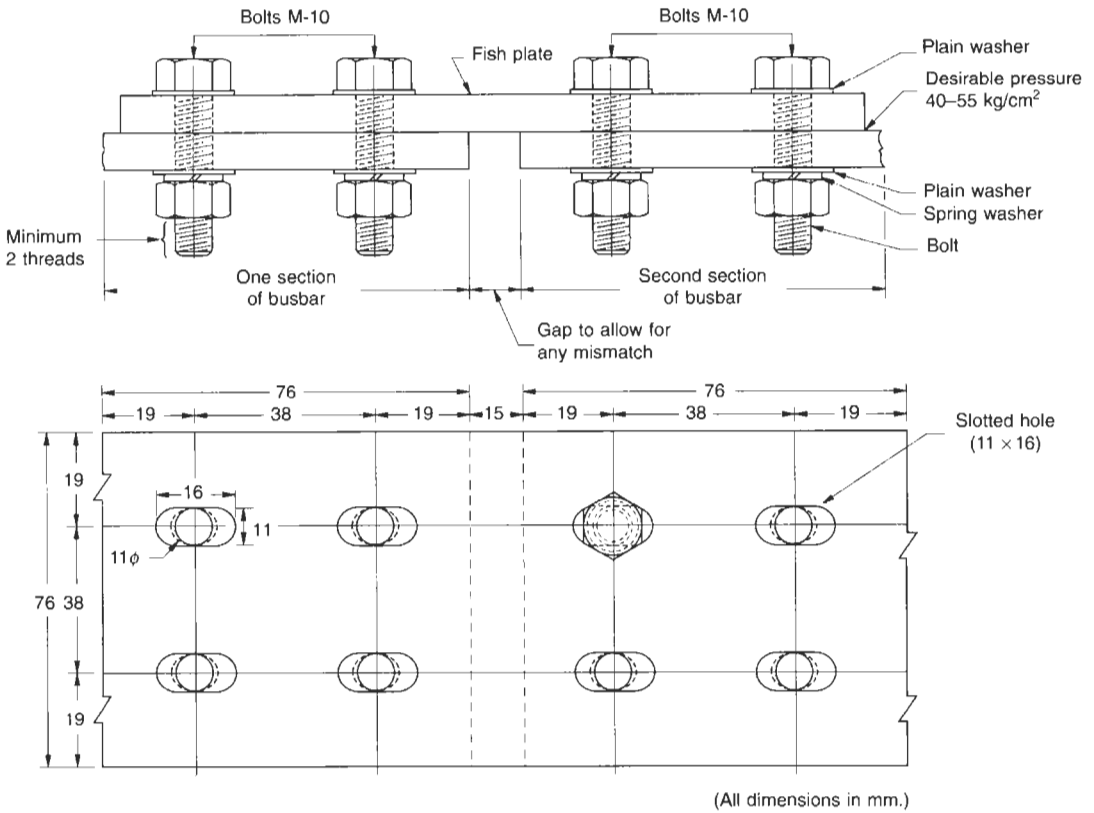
A typical arrangement for jointing two sections of a busbar through a fish plate
